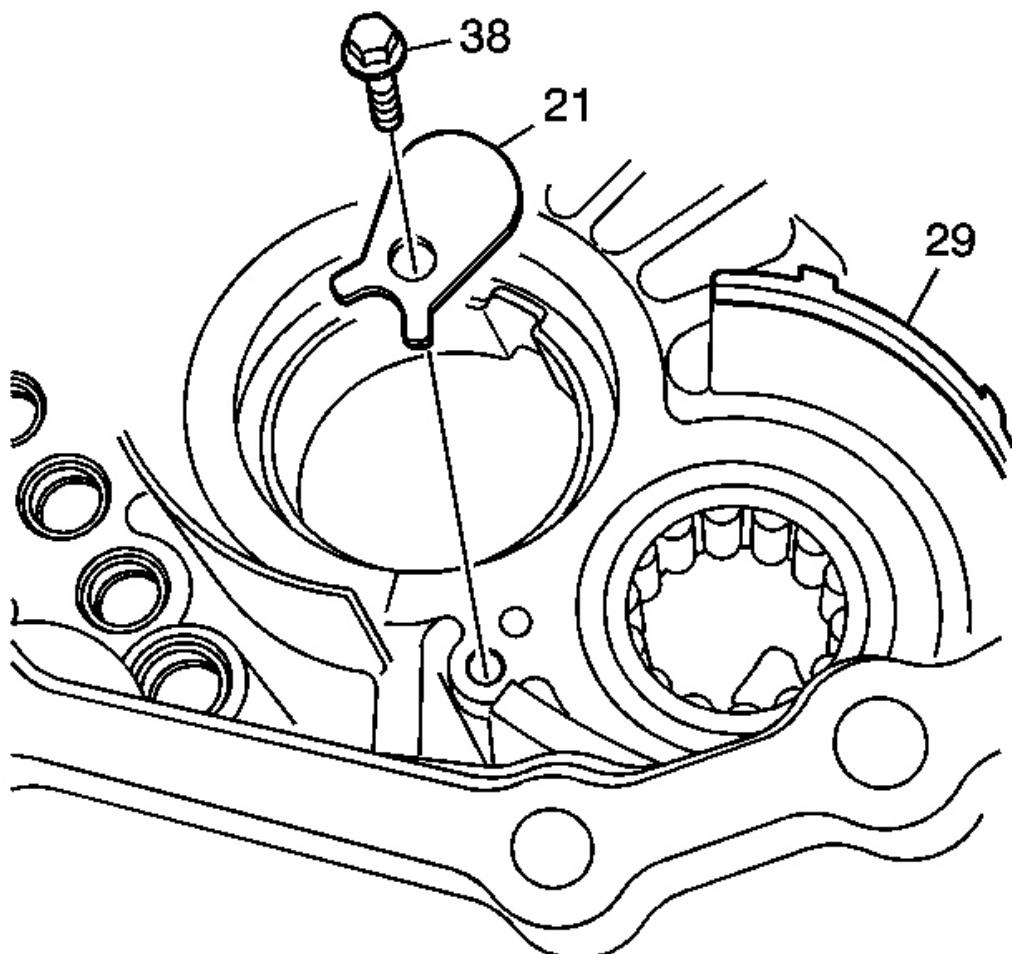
View Of Bearing Retainer, Bolt & Gasket
